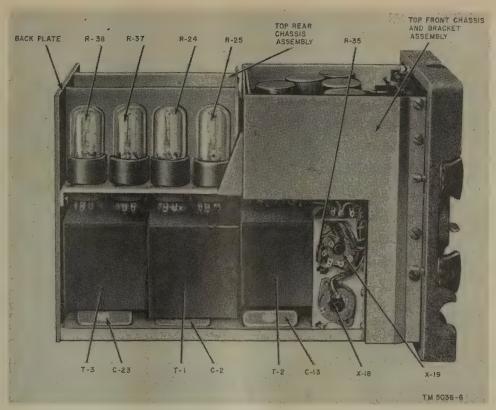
Power Supply PP-112/GR, left-hand side view of chassis.
